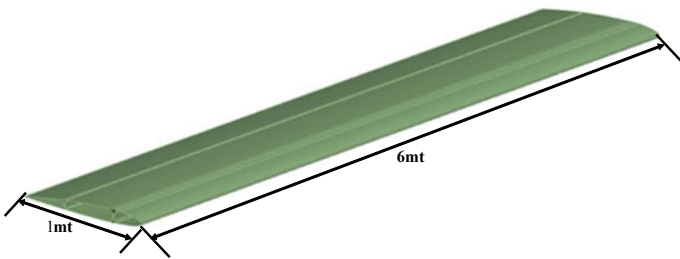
illustrates the aircraft wing structure with triangular surface crack having same geometrical dimensions. The single triangular cracks are introduced at differed
